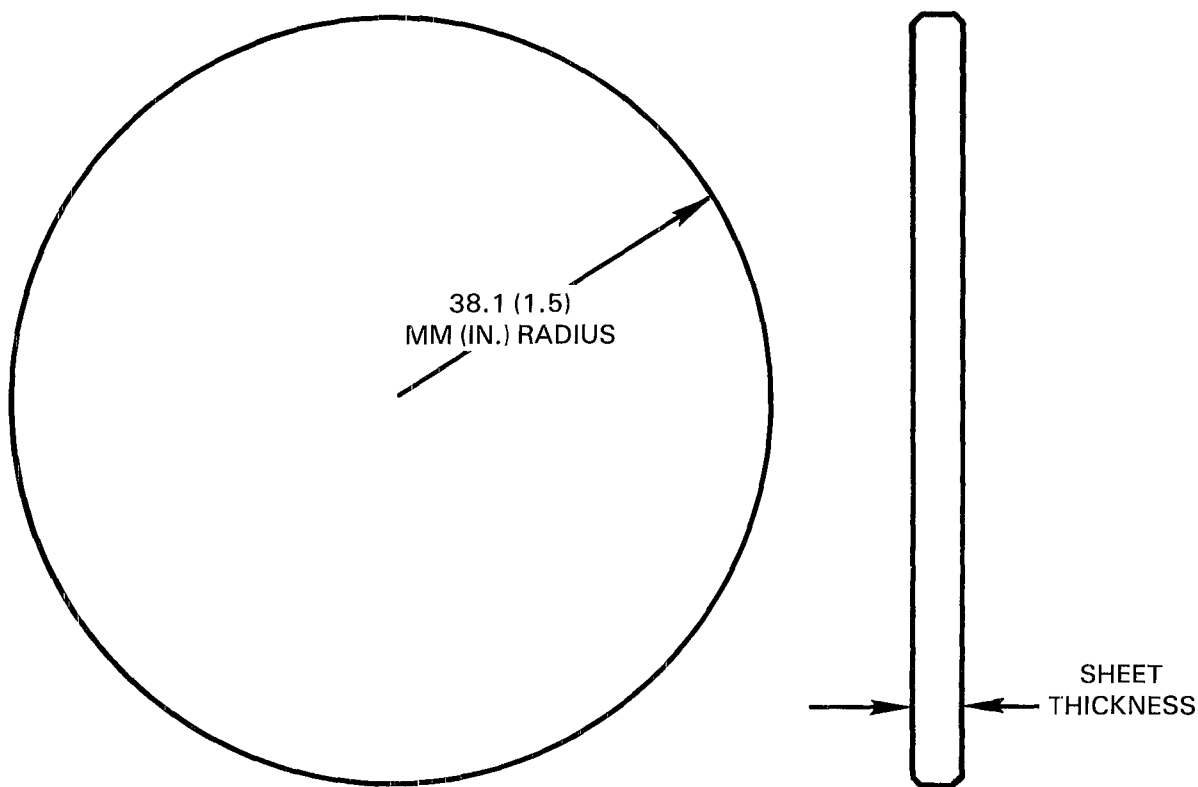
Hot Spot Blister Thermal Fatigue Test Specimen
